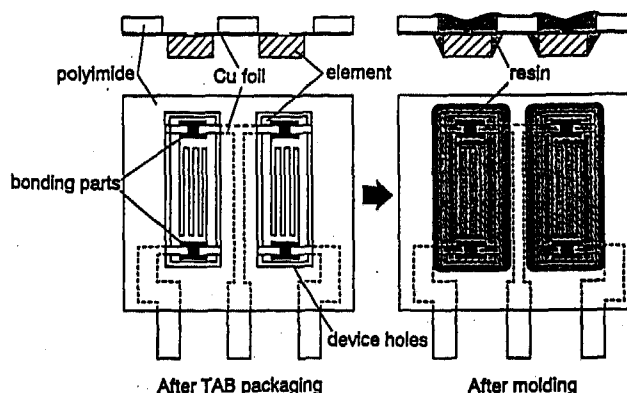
Construction of inner lead bonding parts to InSb thin-film MR
